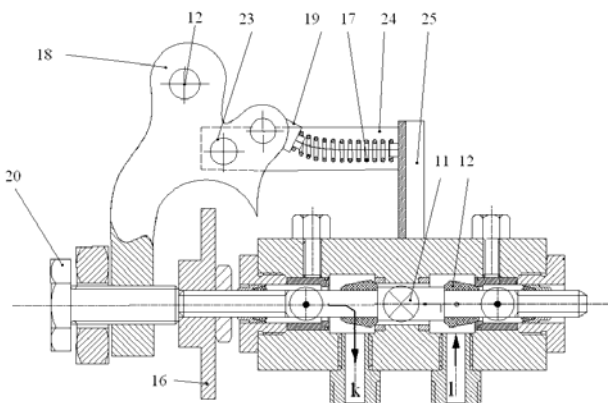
Section through the hydraulic directional control valve equipped with mechanical prompt with a vertical plane
